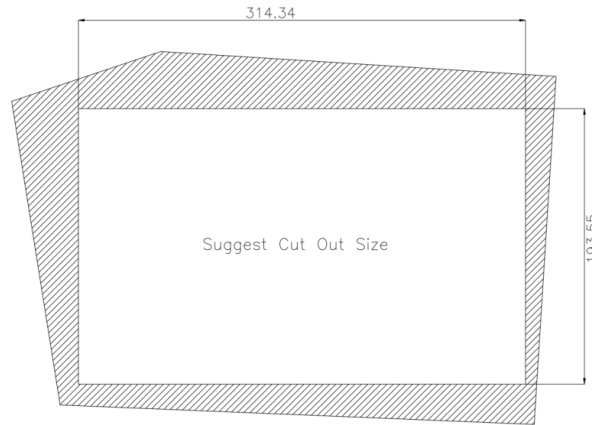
DM2-W133K(L) Cutout Dimensions (Unit: mm)
